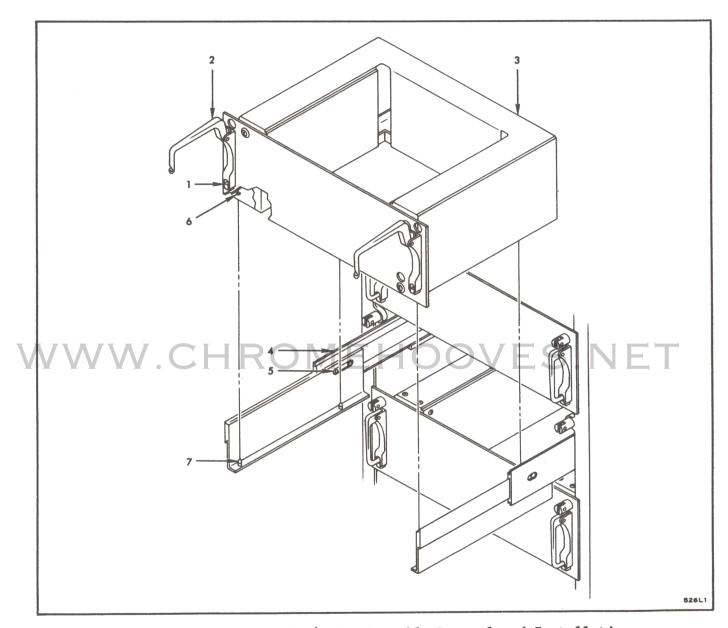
Typical R/V AGE Assembly Removal and Installation
